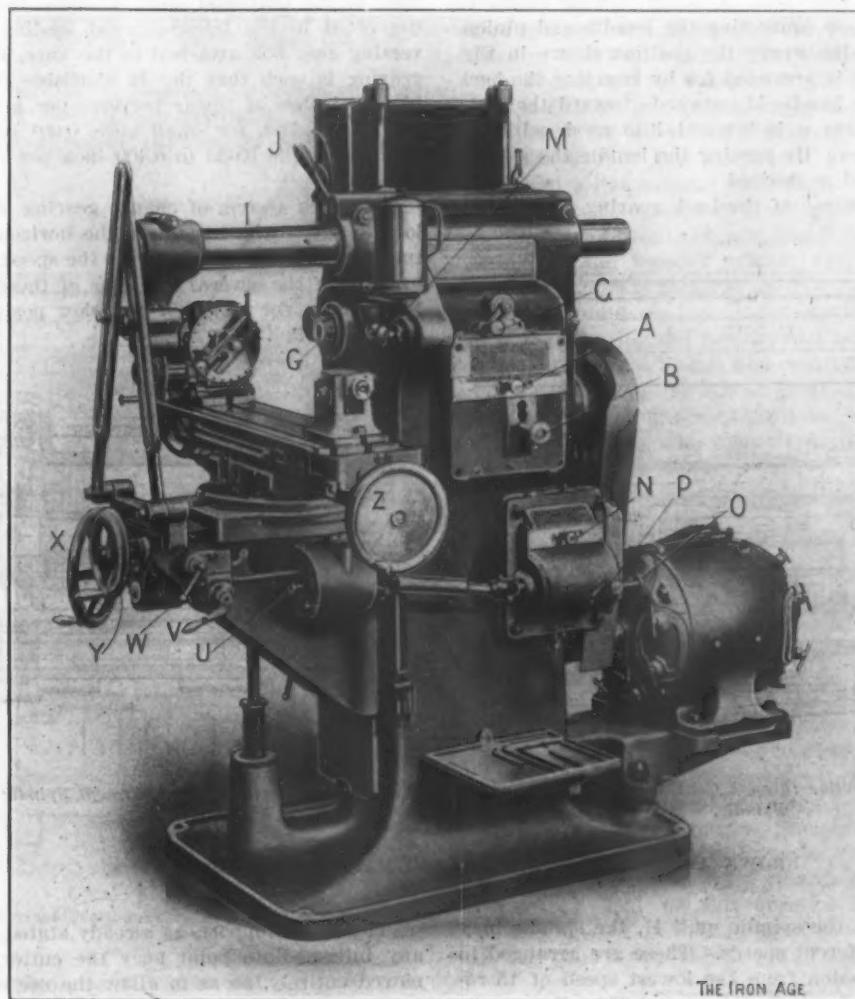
Front Side View, Showing Spindle Drive and Feed Gearing Control.
